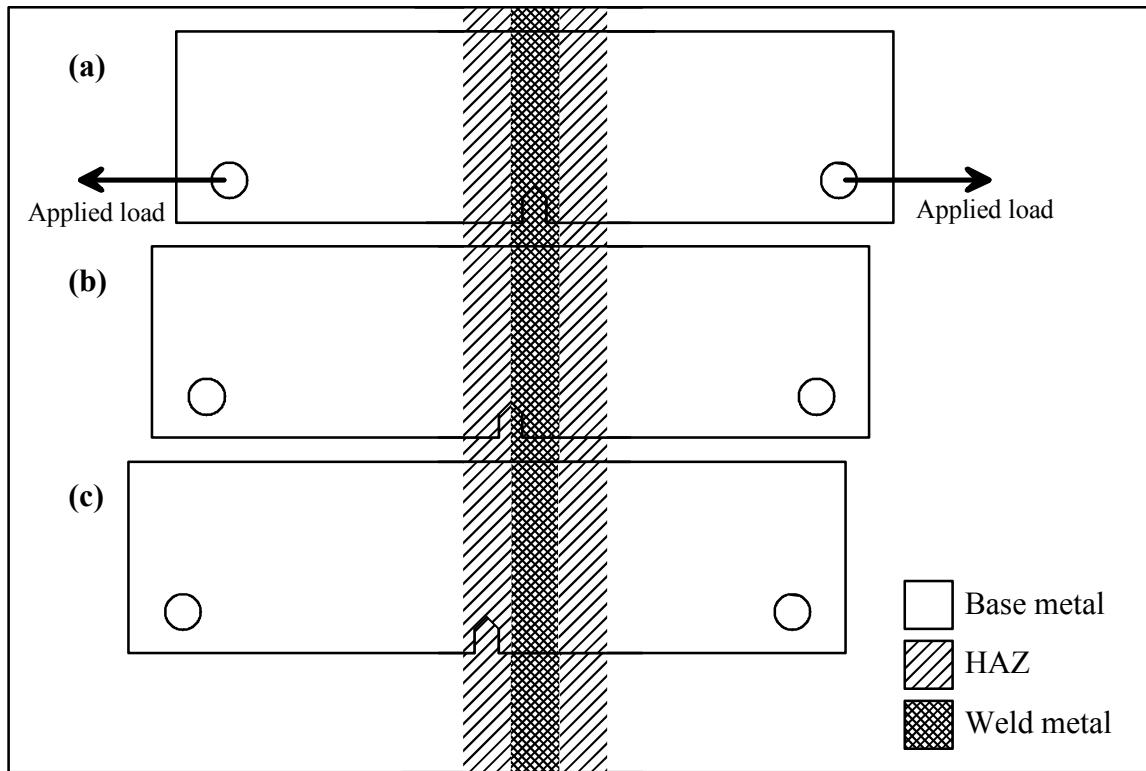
The locations of the crack starter notches are schematically shown: (a) at the weld center, (b) at the interface between the weld metal and HAZ, and (c) in the HAZ.
